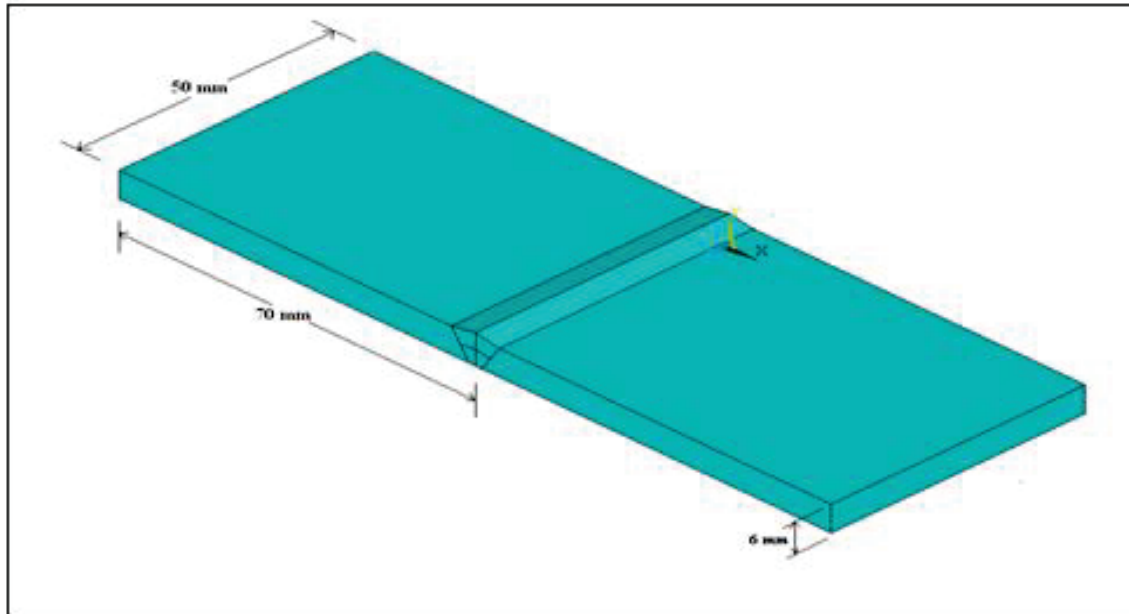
Solid model of the weld plate used in the experiment
